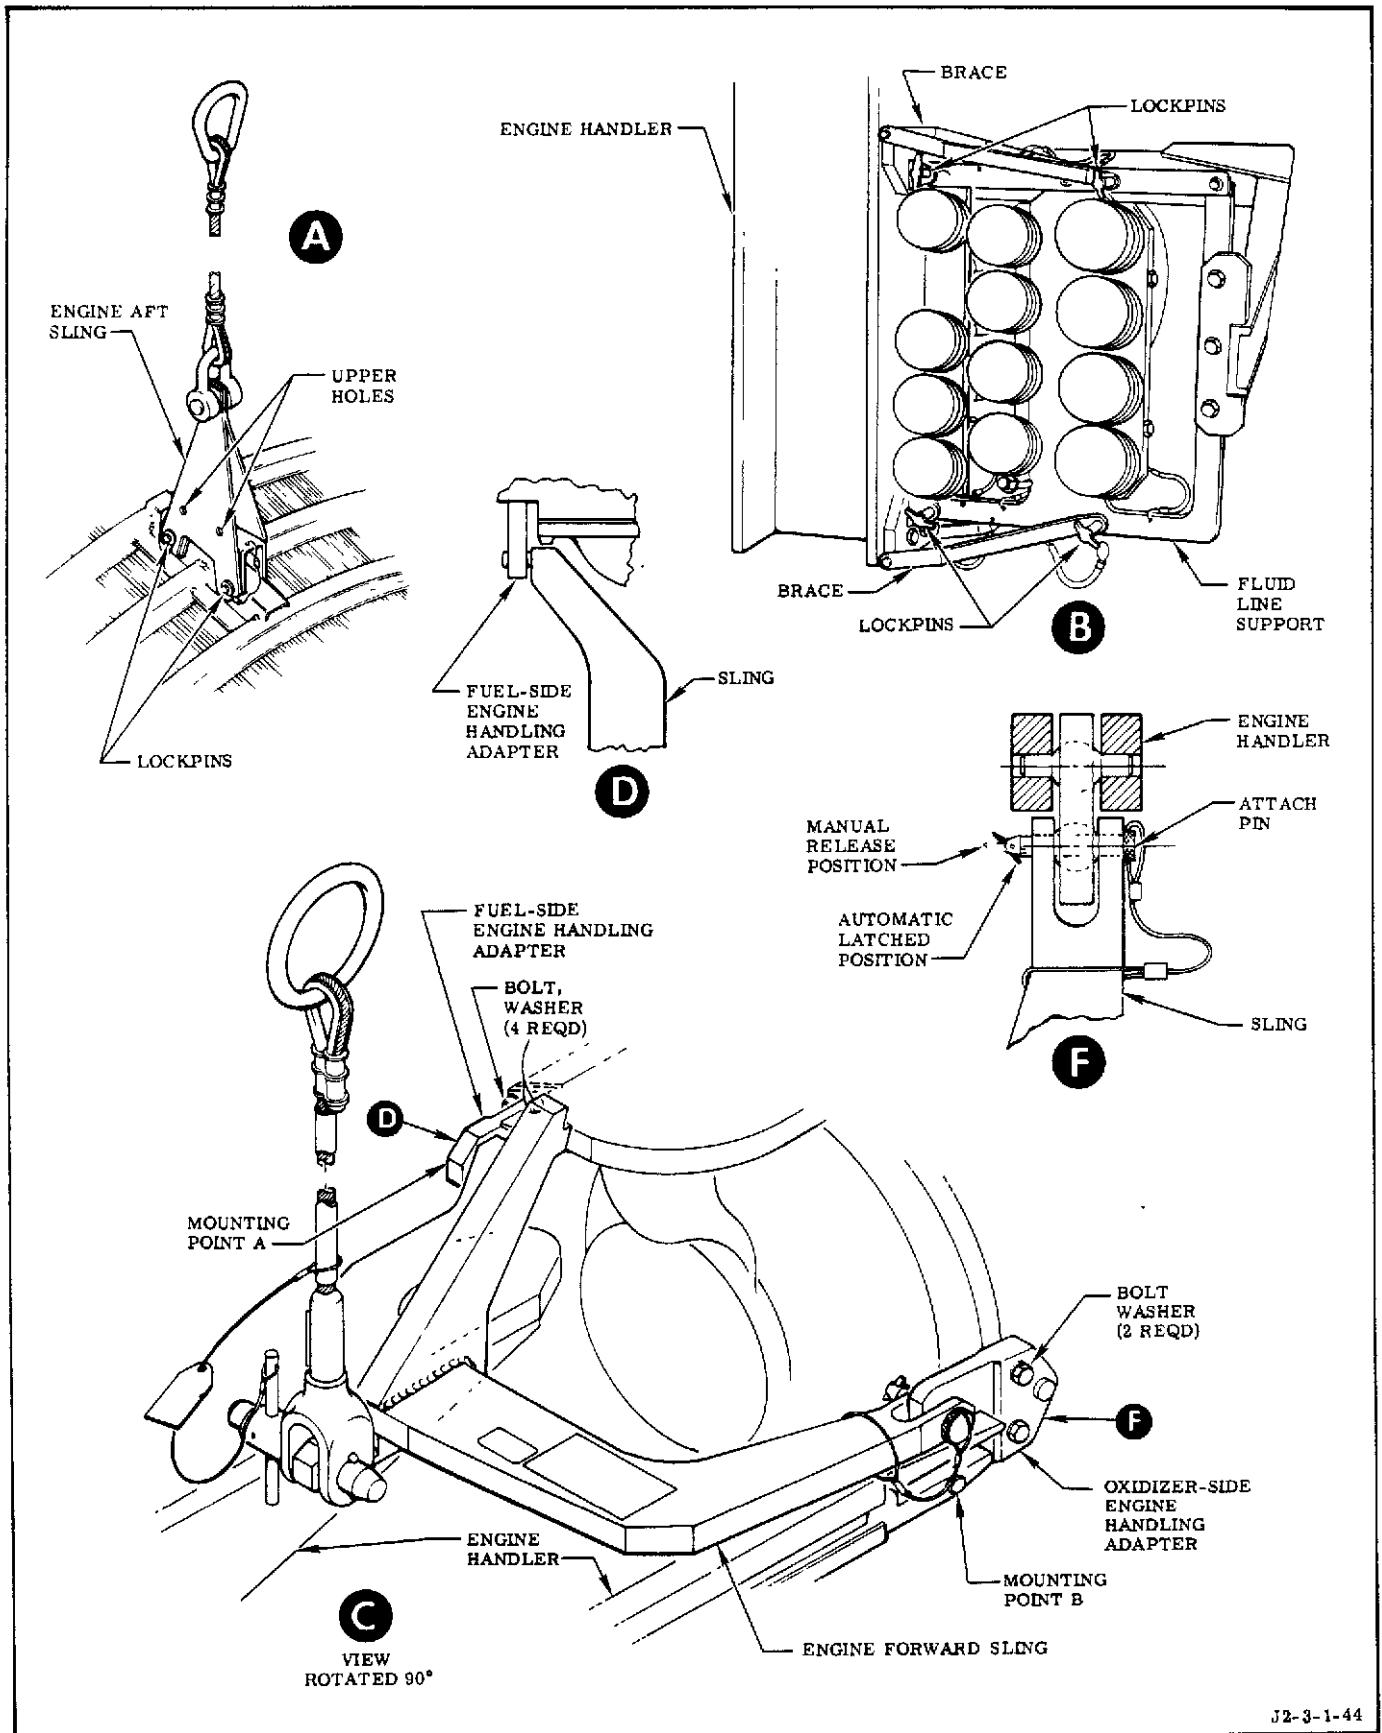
Engine Handling Method and Attach Points (Sheet 1 of 2)
